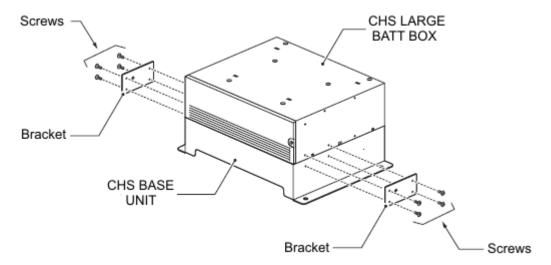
Installing the CHS LARGE BATT BOX using the CHS2U JOINT BRACKET KIT
